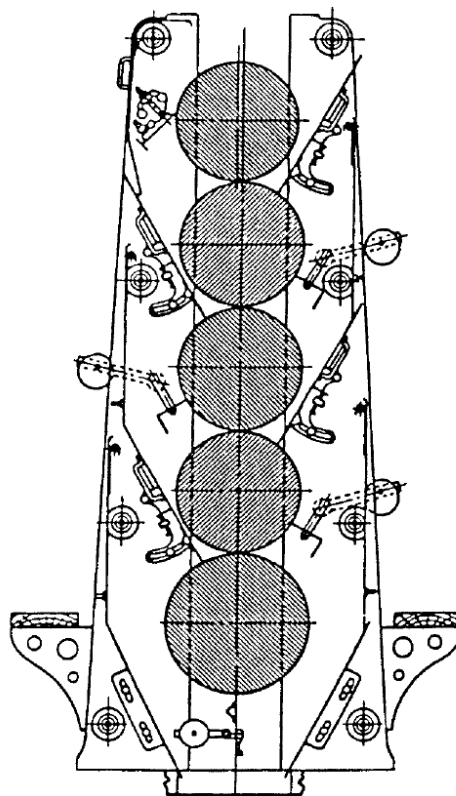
Five-high crushing rolls (Courtesy of The French Oil Mill Machinery Co., Pigua, Ohio).
